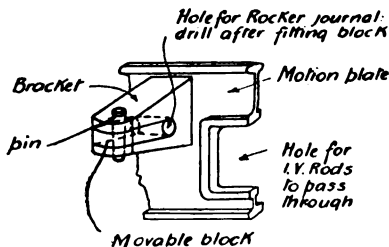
SKETCH SHOWING ROCKER BRACKET AND PART OF MOTION PLATE FOR GEAR ILLUSTRATED IN FIGS. 4 AND 5.
